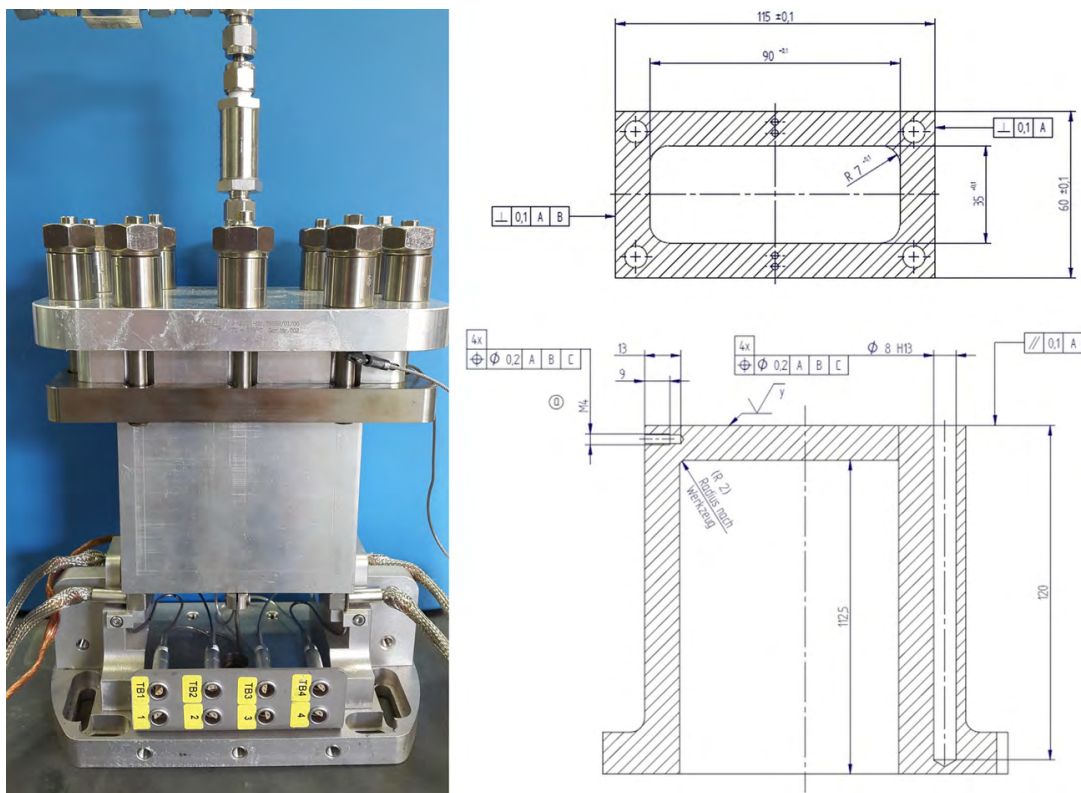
Left: Frontal view of the aluminum tank with the connection board. Right: Technical drawing of the inner tank dimensions (top: top view, bottom: side cut).
